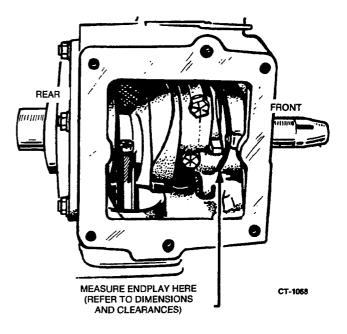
MEASURING CRANKSHAFT ENDPLAY
